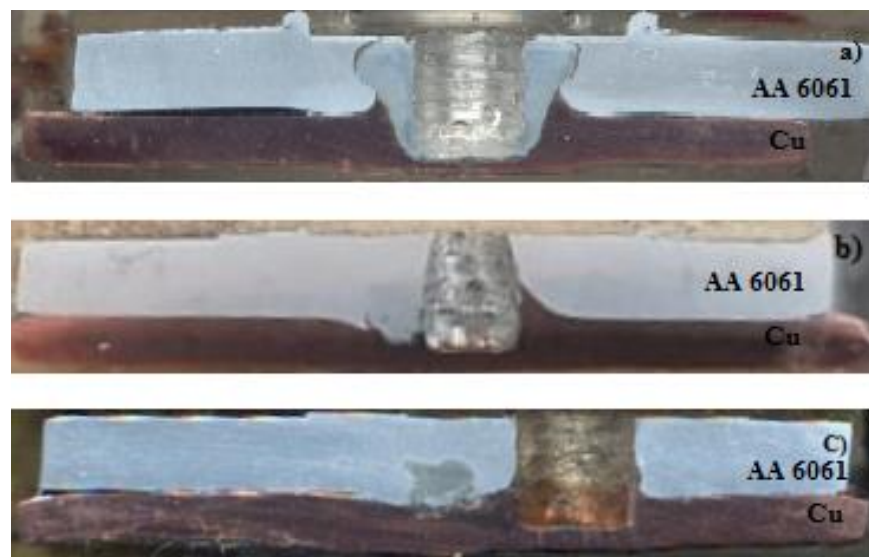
Macro-structure of specimen at 2200 rpm – 0.2 mm plunge depth a) traditional fssw b) stitch fssw at 2 mm weld distance c) stitch fssw at 4 mm weld distance.
